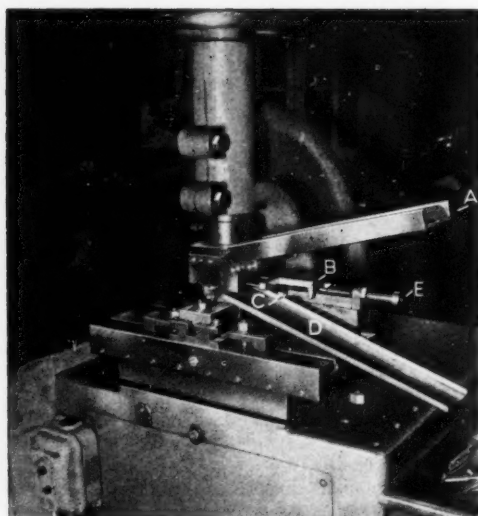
This Special-purpose Machine, Developed by C. E. Johansson, will Roll-mark Tap Blanks at the Rate of 3,000 per hour
